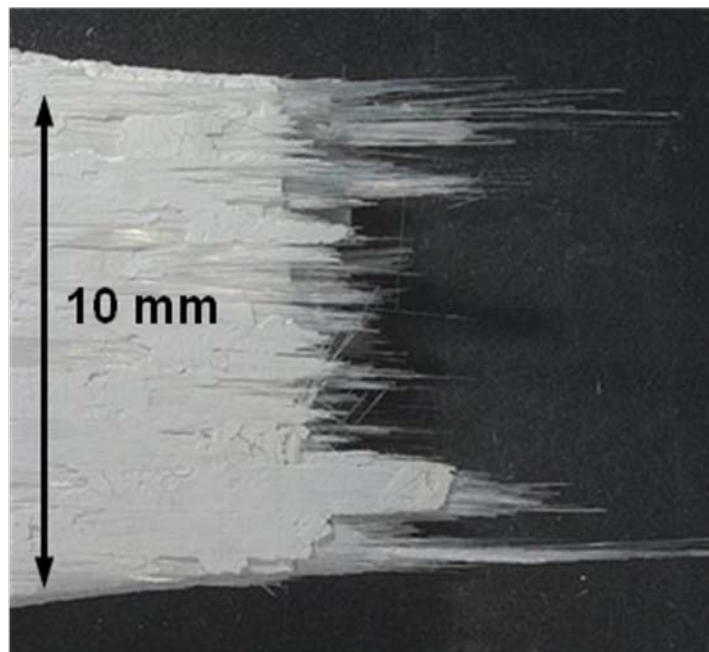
Fracture surface of the N720/AM specimen(2) tested in tension to failure with constant loading rate of 25MPa at 1100°C in steam (side view).
